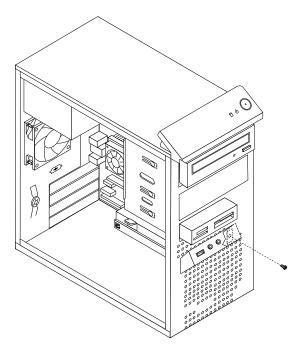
Removing the screw that secures the front audio and USB assembly to the chassis
